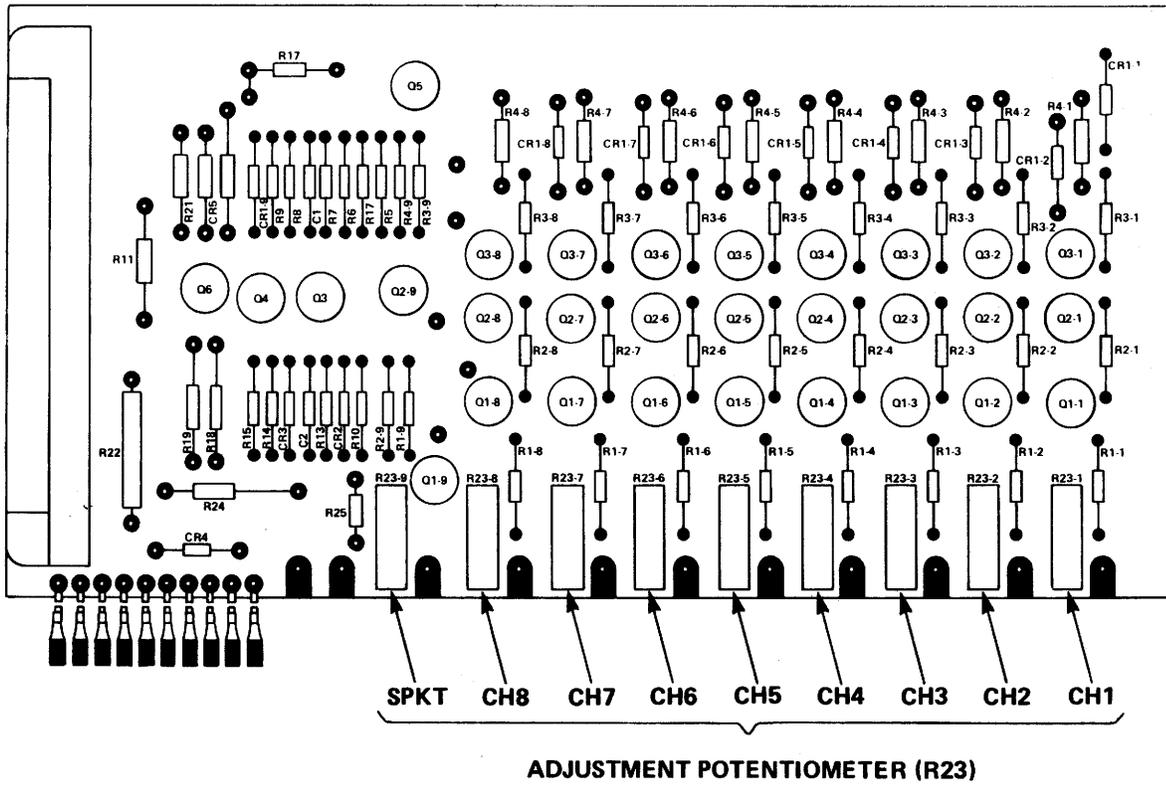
LAC Board Locations (Sheet 1 of 2).
